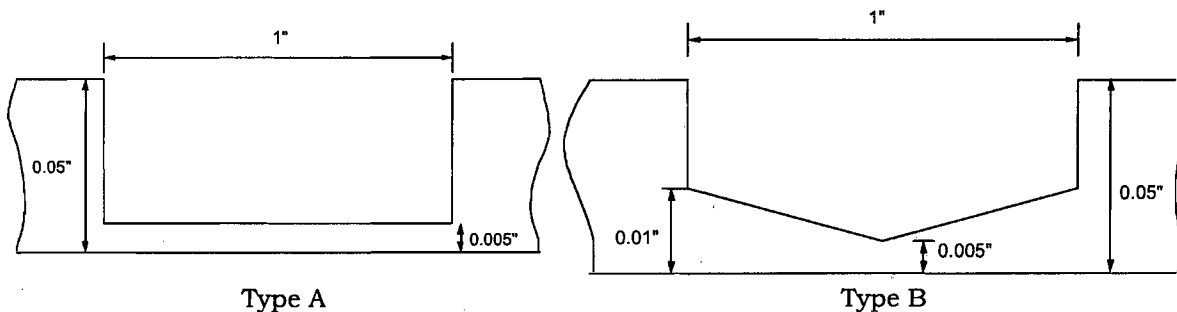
Type A: single rectangular notch and Type B: single trapezoidal notch.
